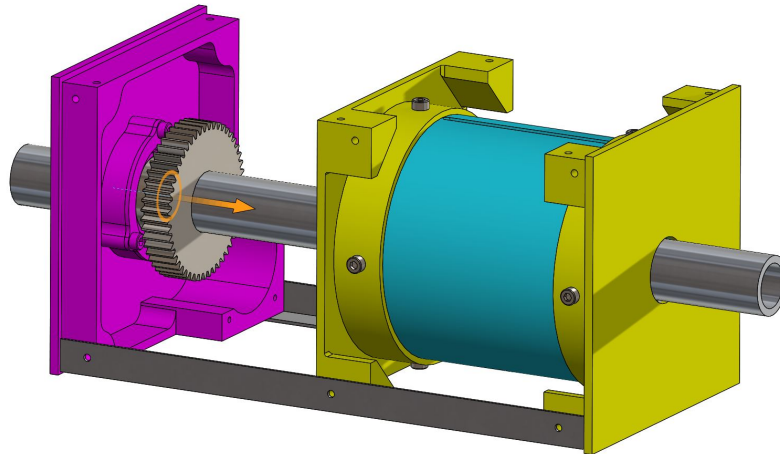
Thread the shaft through the left lid and push the lid towards the drivetrain sub assembly until it hits the L-profiles. Parts of the flange on the gear should be in the bearing at this point. Ensure that the screw holes are coincident and the motor holder is at the bottom.
